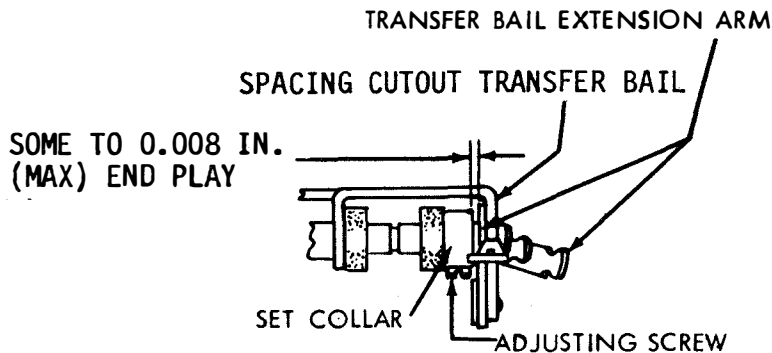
Spacing Cutout Transfer Bail Set Collar, Bottom View
